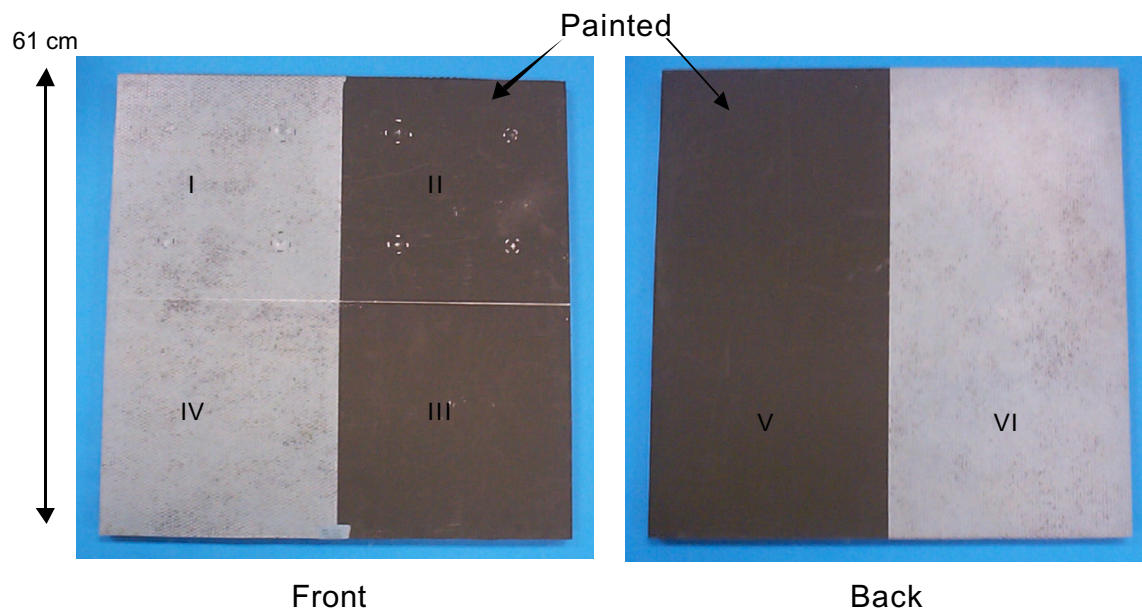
Front and back views of honeycomb sample with designated inspection areas.
